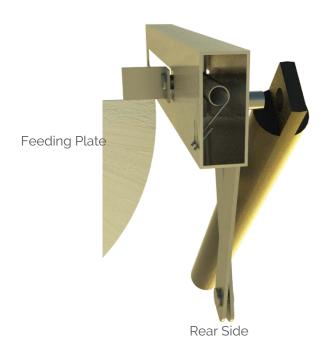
Rear side of the sliding mechanism showing spring attached to channels
